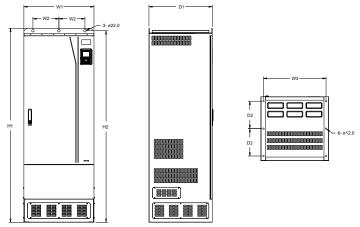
Floor installation diagram of inverters of 660 V, 400 to 630 kW
